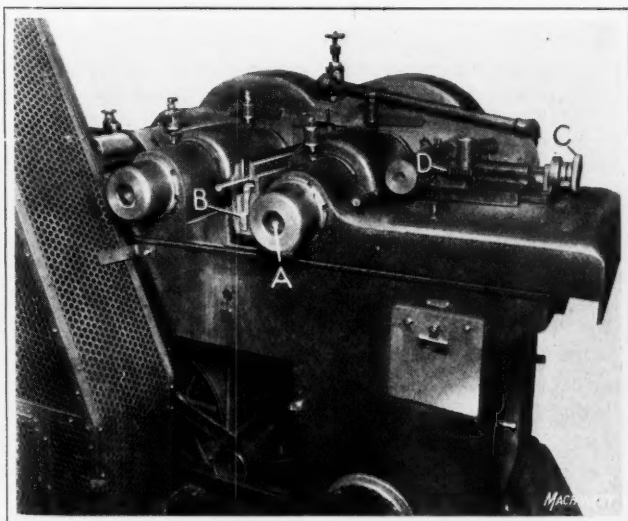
Driving Side of Centerless Grinder, showing Grinding Wheel and Regulating Wheel Shafts and Wheel-truing Device
